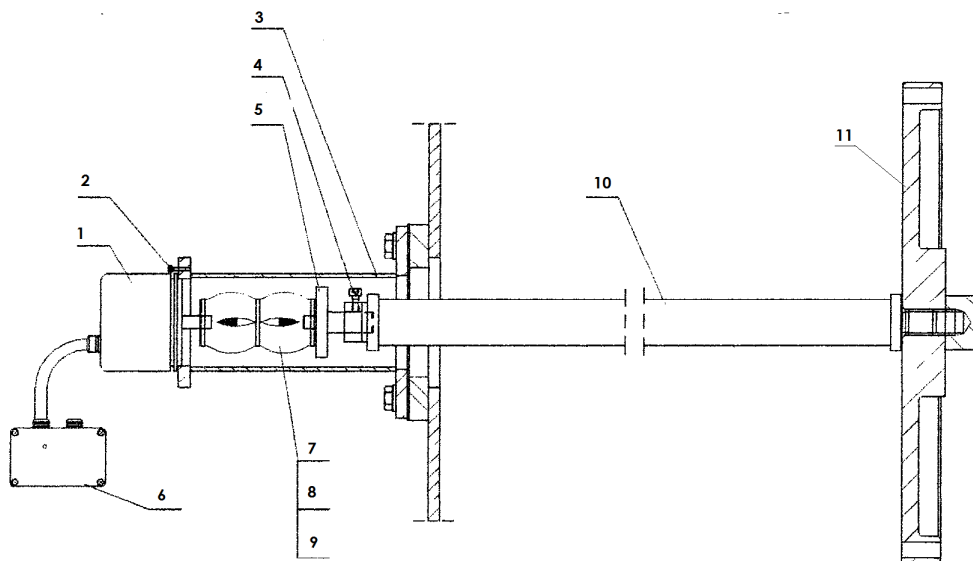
Alpha Lubricator System, angle encoder installation diagram [3]:
